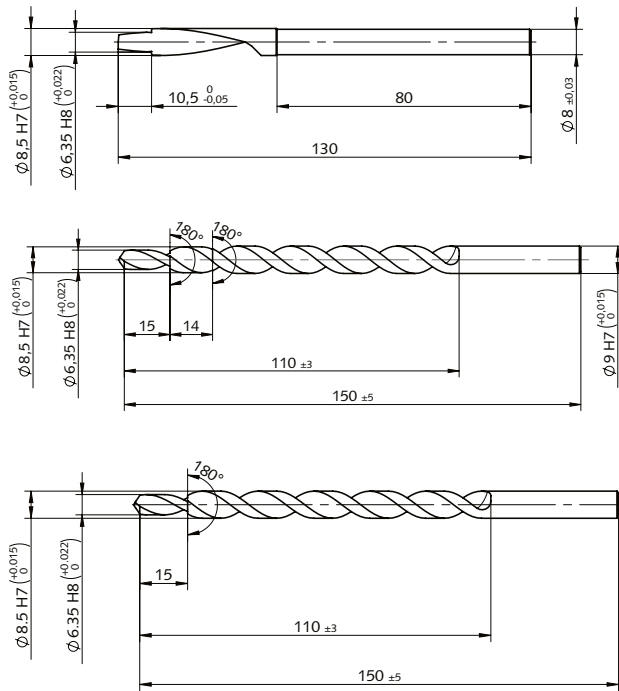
Step drill Type 1337, 1337A, 1337A2
